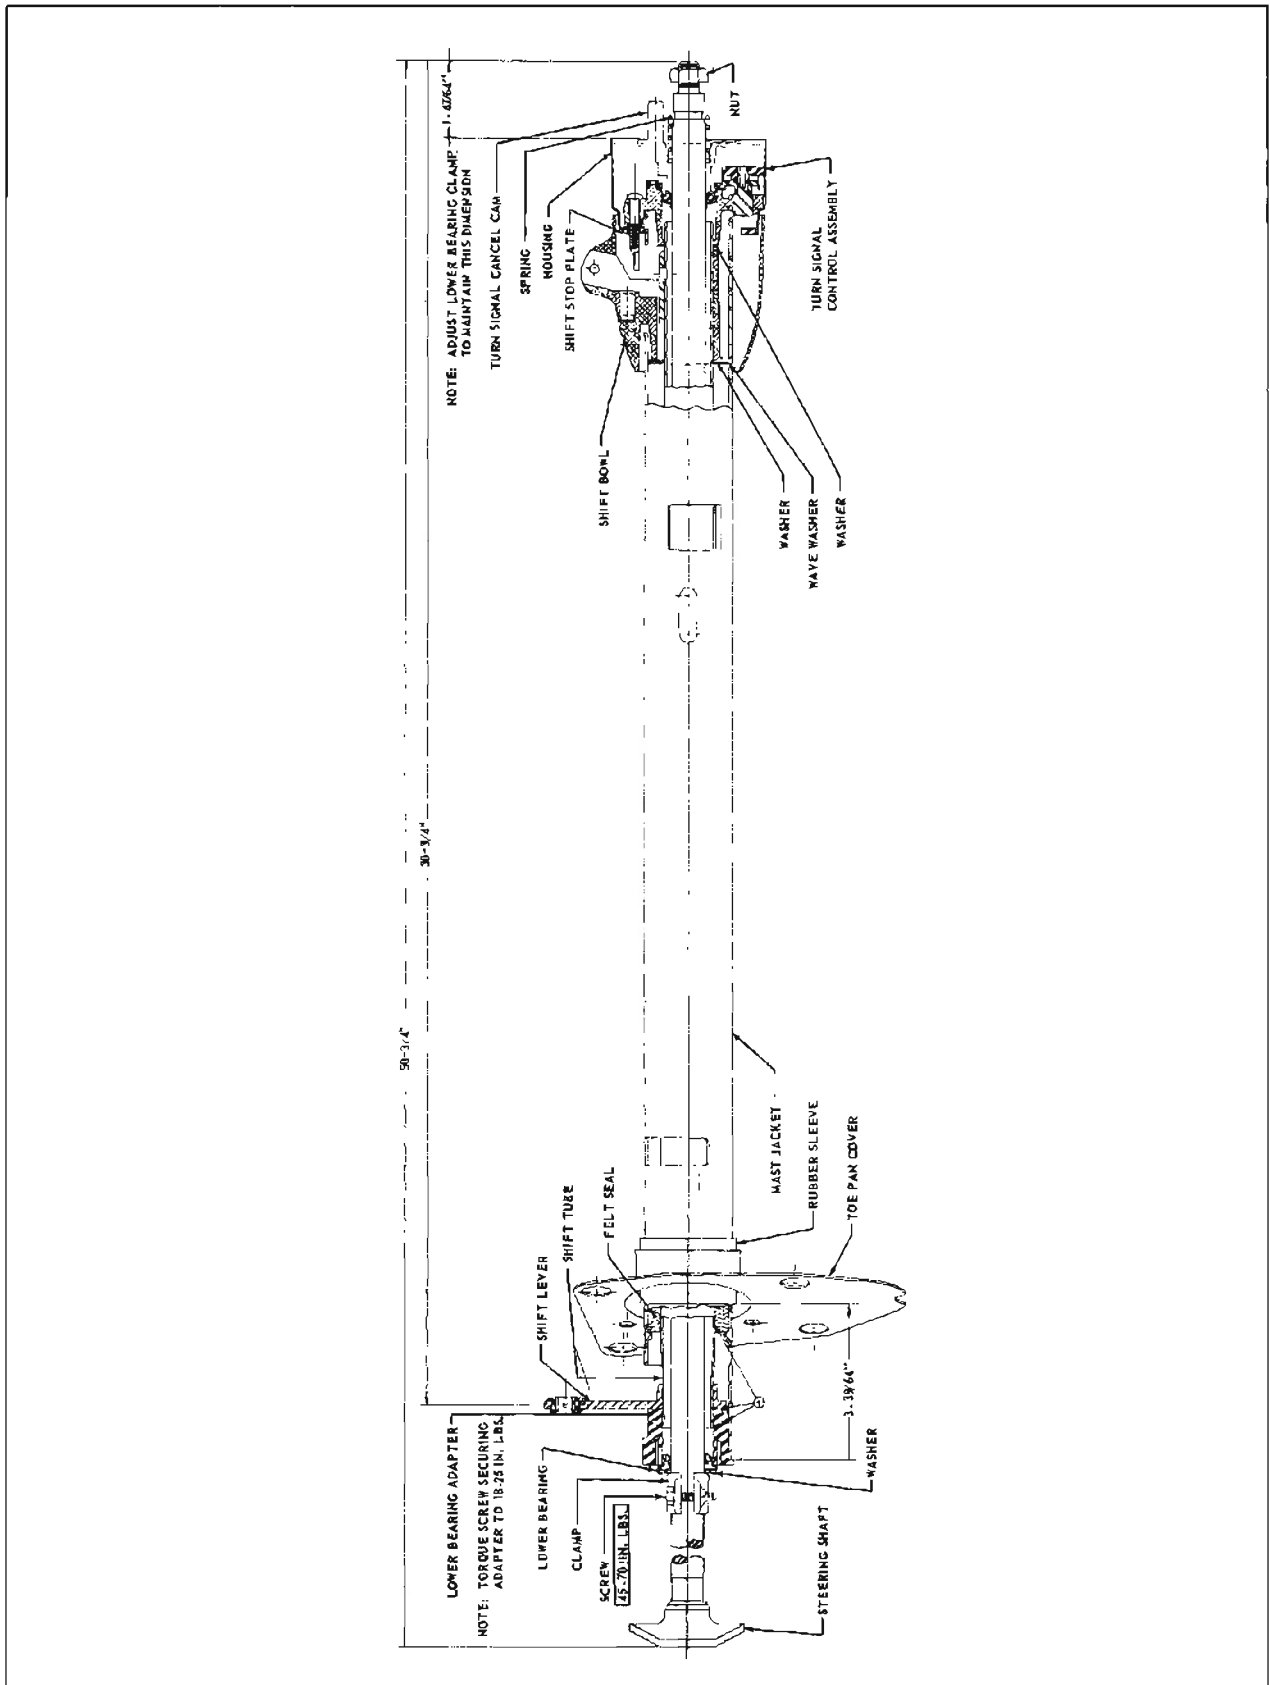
Mast Jacket and Transmission Control Shaft Assembly - Automatic Transmission
